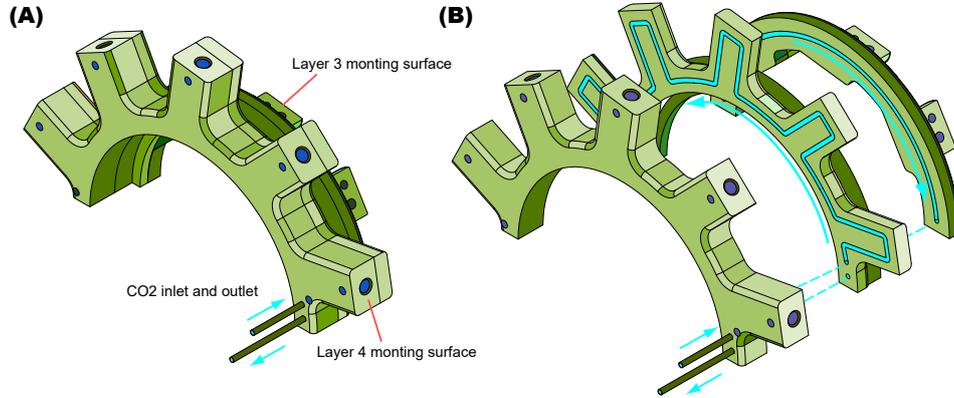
The end-rings for the Layer 3 and Layer 4 in the backward direction. (A) The end-ring in its final shape, after bonding; (B) exploded view of the individual layers before bonding, showing the CO₂ channels.
